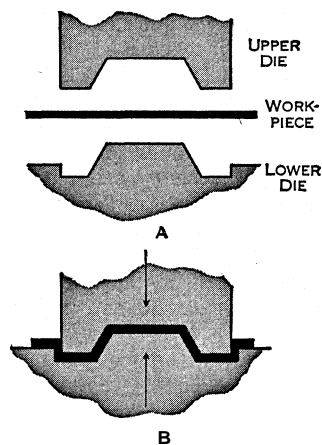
BASIC MACHINE-TOOL OPERATIONS: PRESSING
